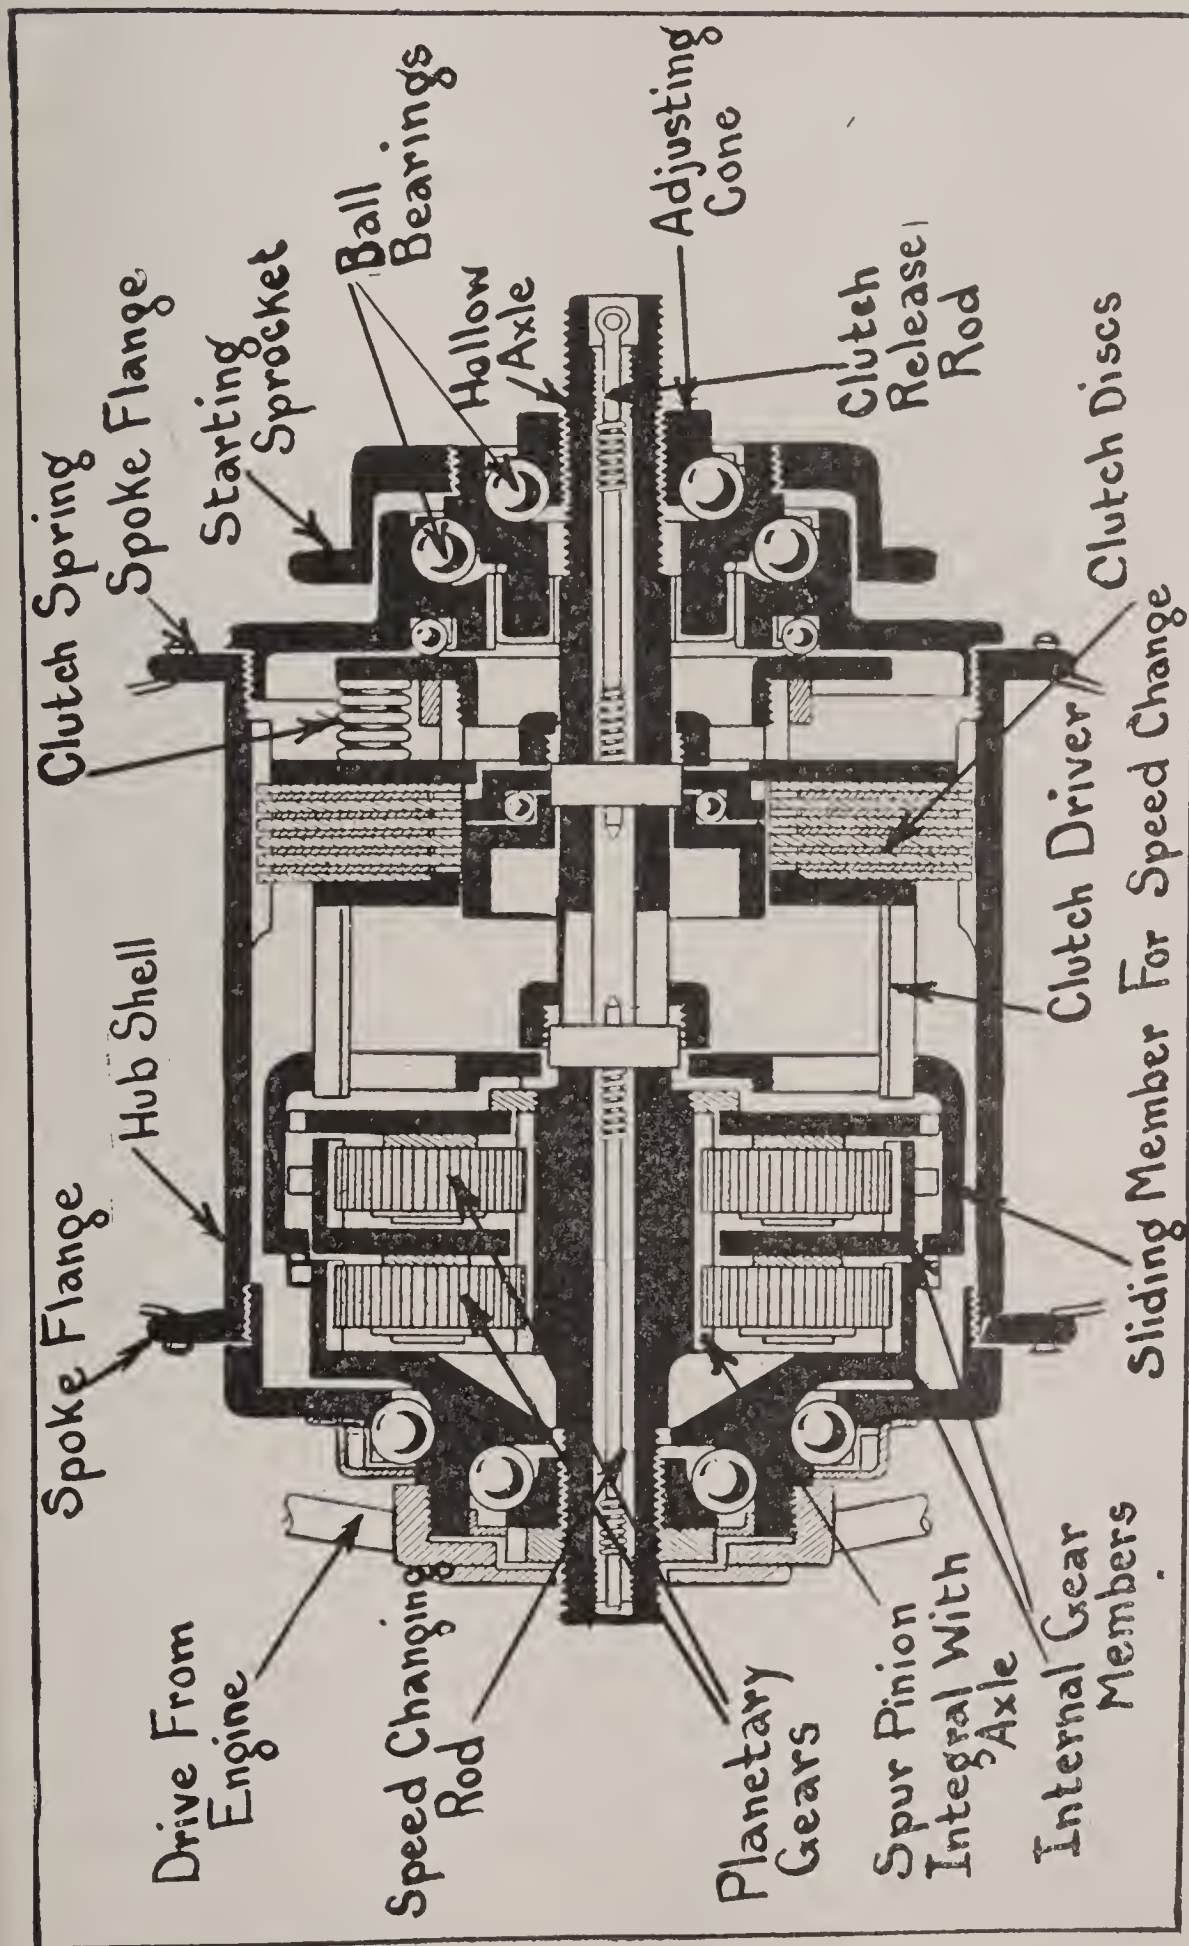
Sectional View Showing Construction of the Sturmey-Archer Three Speed Planetary Rear Hub Gear.
